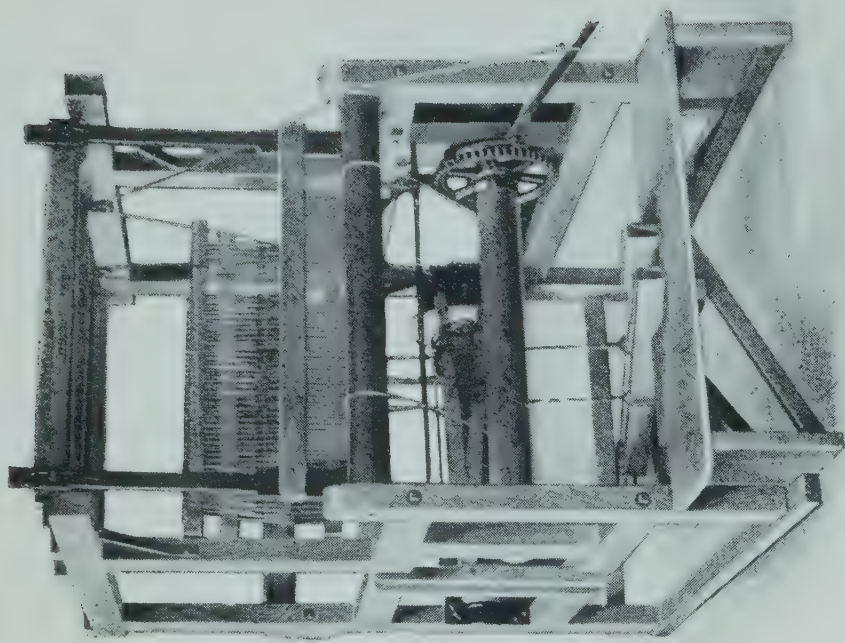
Loom for making Coir and Wool Bordered Mats.
